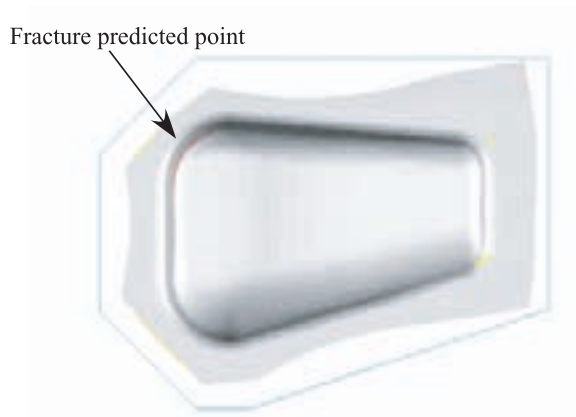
Forming shape of 6000 series aluminum alloy at 30 mm up from bottom center calculated by using YLD89.
